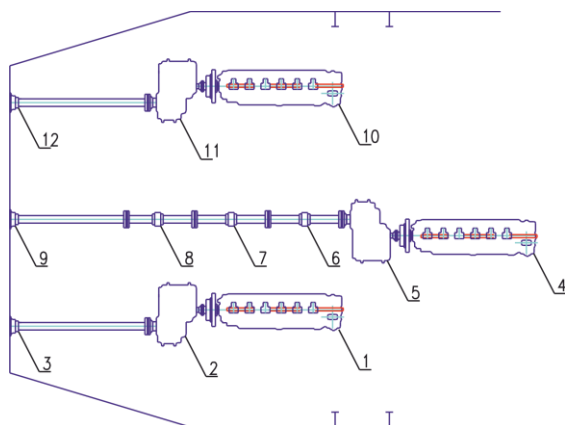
Schematic diagram of the ship drivetrain: 1 – starboard (SB) Sulzer main engine of 6ATL25D type, 2 – SB gearbox, 3 – SB stern tube stuffing - box, 4 – central Sulzer main engine of 6ATL25D type, 5 – central gearbox, 6 – radial bearing No. 3, 7 – radial bearing No. 2, 8 – radial bearing No. 1, 9 – central stern tube stuffing - box, 10 – port side (PS) Sulzer main engine of 6ATL25D type, 11 – PS gearbox, 12 – PS stern tube stuffing – box
